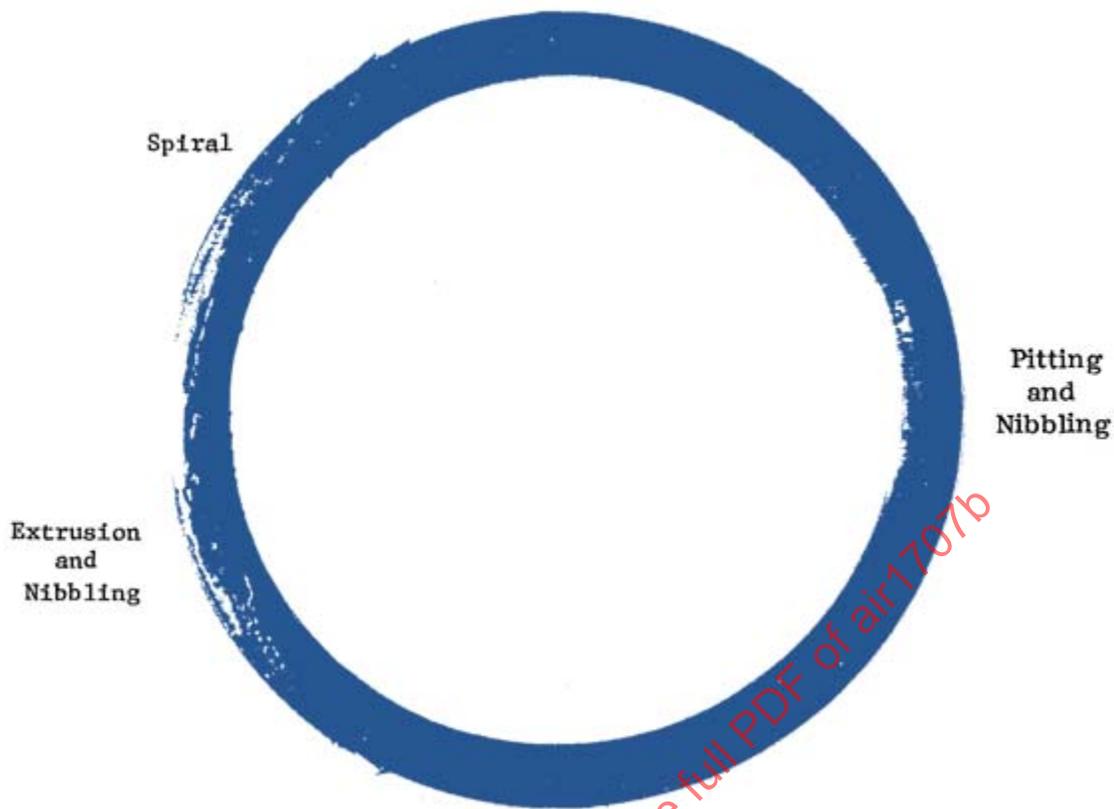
NIBBLING, EXTRUSION, PITTING, AND SPIRAL FAILURE
